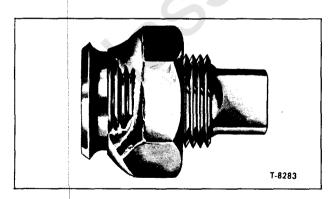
Budd Type Damaged Inner or Outer Cap Nuts
